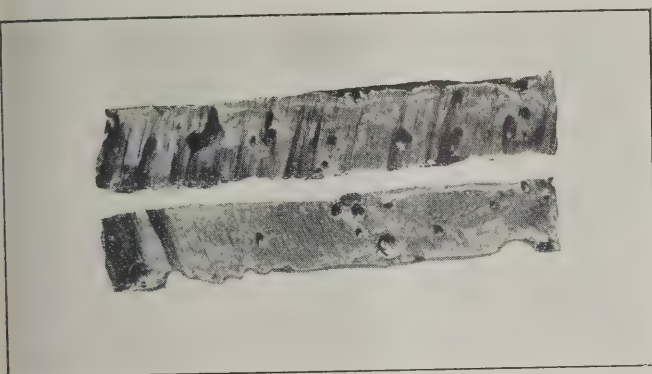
Photograph Showing Section Through Arc Weld Using Plain Monel Wire Electrode Without Deoxidizer Coating. Numerous Blowholes Present
